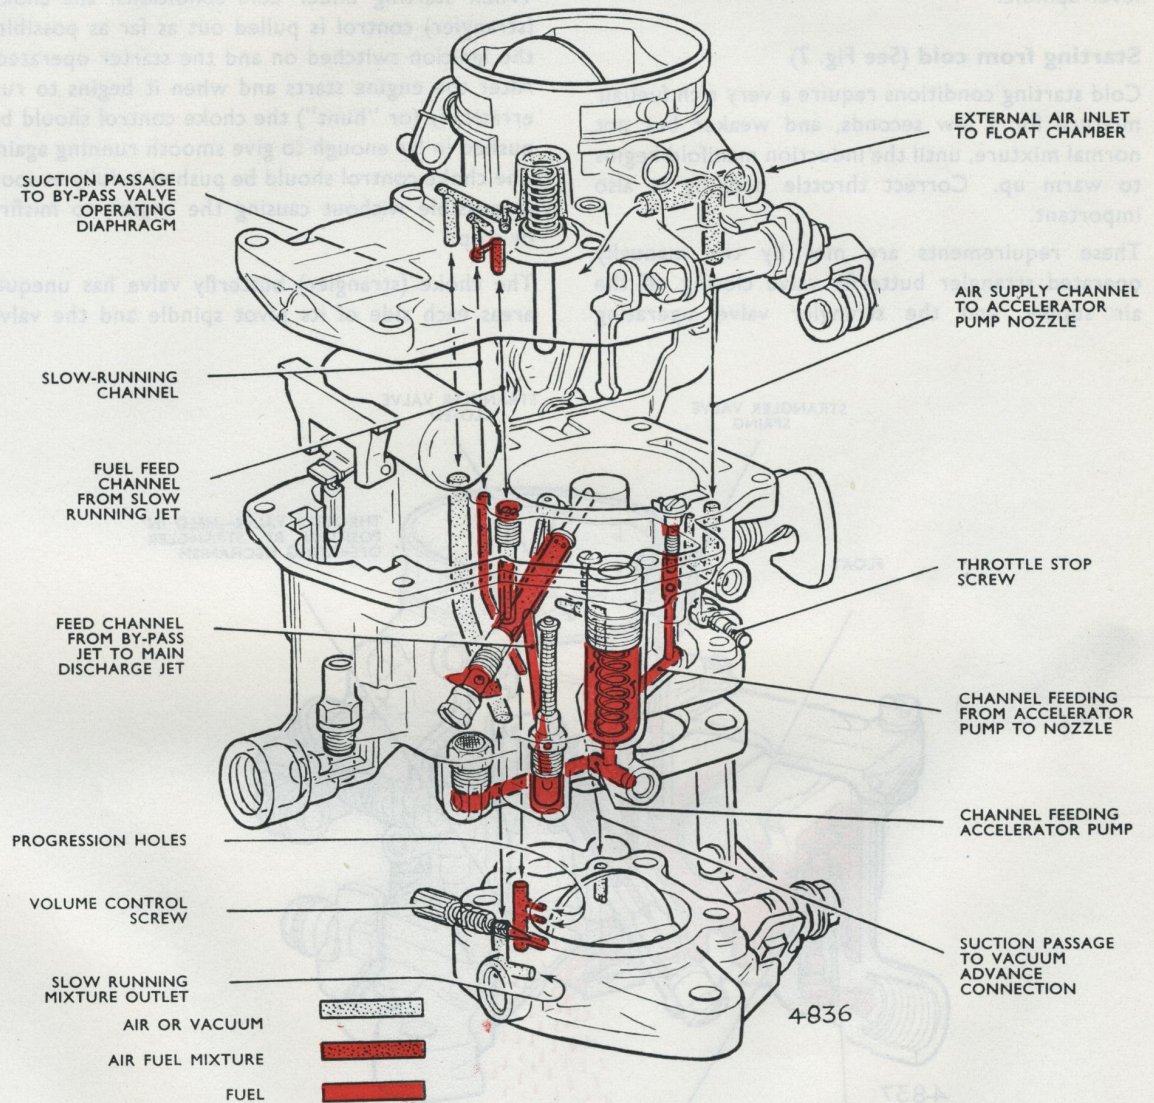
Zenith WIA 36 carburettor. Arrangement of channels
